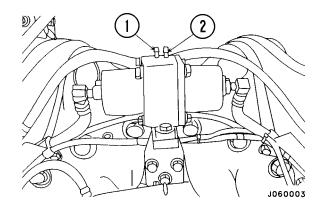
SLACK ADJUSTER 1. Air Bleed Plug 2. Air Bleed Plug
